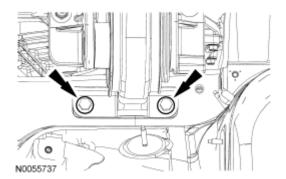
Identifying Bottom Transaxle Support Insulator Bolts Courtesy of FORD MOTOR CO.
